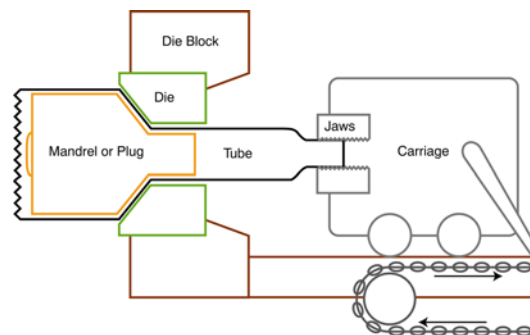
Schematic of the cold drawing method for cold working of the tube
